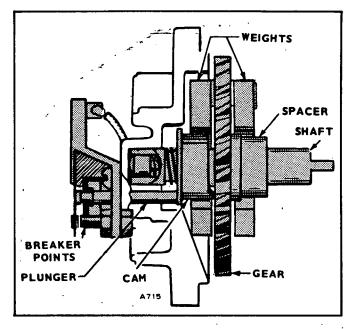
CENTRIFUGAL SWITCH ASSEMBLY
